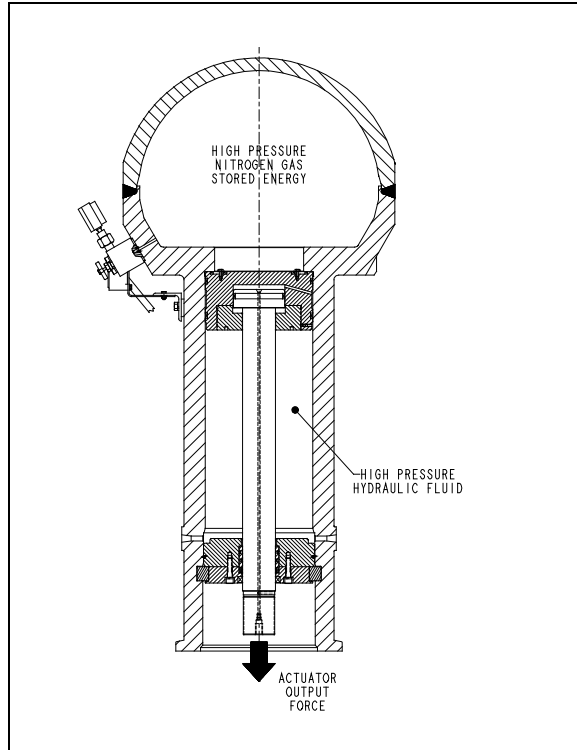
, Cutaway View of the Flowserve Edward Type A, Gas / Hydraulic Actuator Cylinder Assembly.
